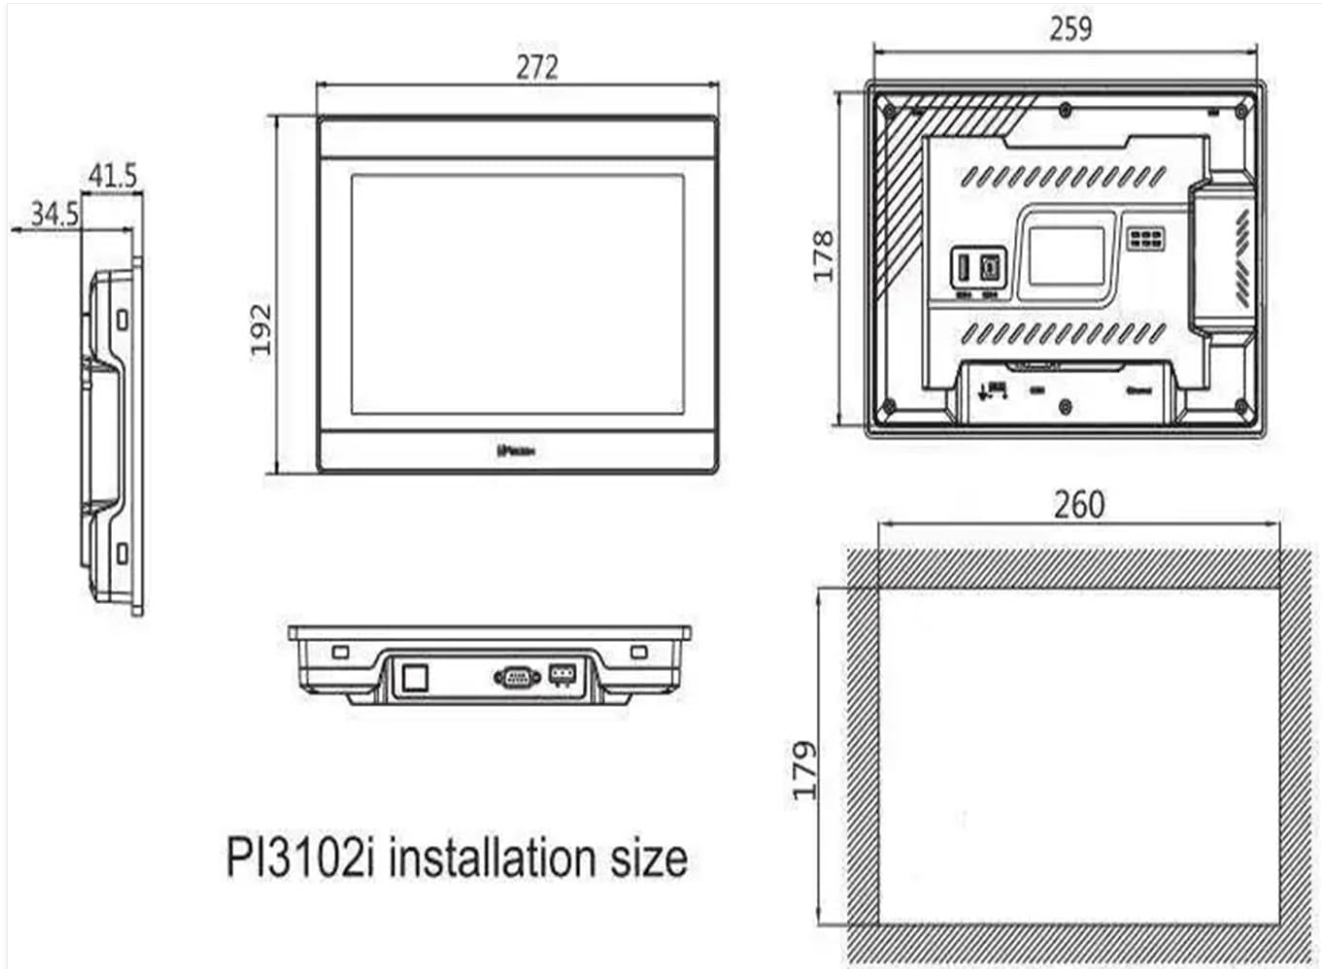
Installation dimensions for the LVSEDTAL PI3102IG-C(AG) HMI. This diagram shows the front panel dimensions (272x192mm), side profile (41.5mm depth), rear view with mounting holes, and the required panel cutout size (260x179mm).
